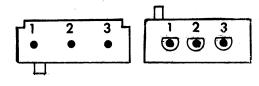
WINCHESTER 54" DRIVE POWER CONNECTOR
